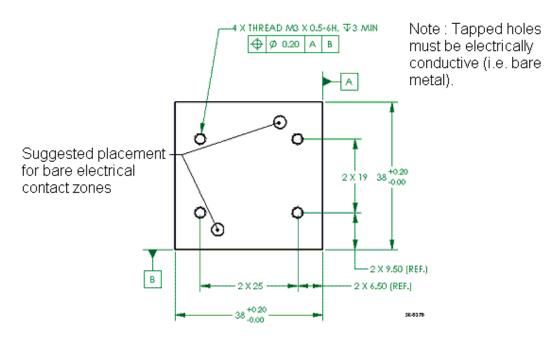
TAPPED HOLE POSITIONS FOR UP12E, WITHOUT PCB
